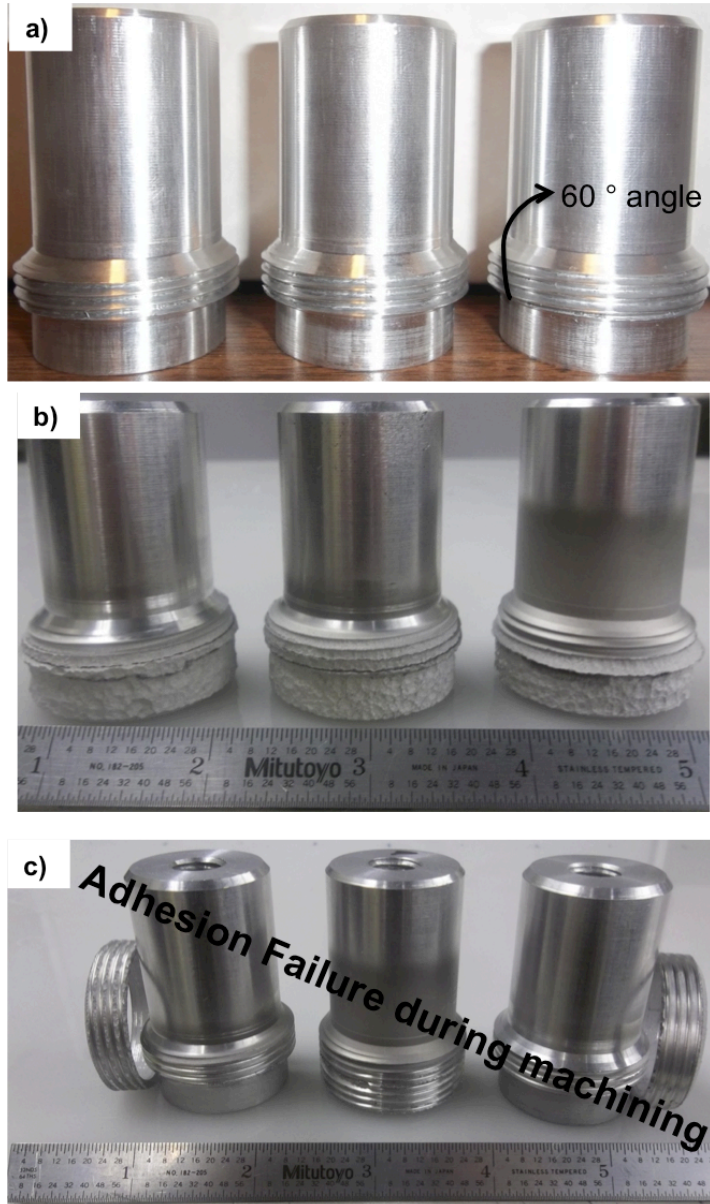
Al2024-T351 substrate partial repair using Al2024 powder. a) Substrate machined to proper dimensions, b) damaged area repaired using cold spray and c) coating failure during machining.
